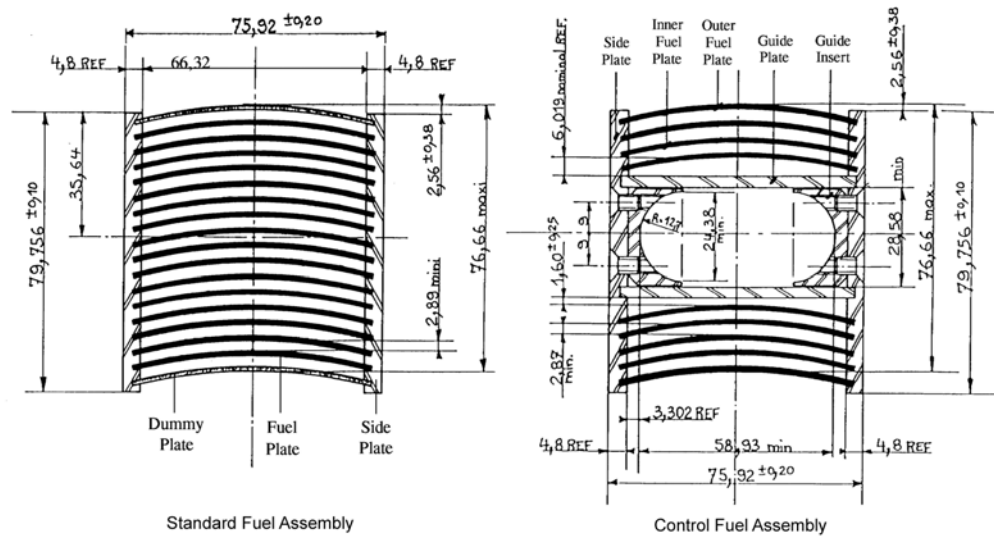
Figure II: MNR Standard- and Control-Fuel Assemblies (dimensions in mm)
